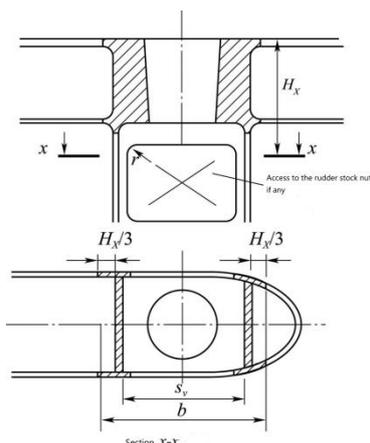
Cross-section of the connection between rudder blade structure and rudder stock housing, example with opening in only one side shown
